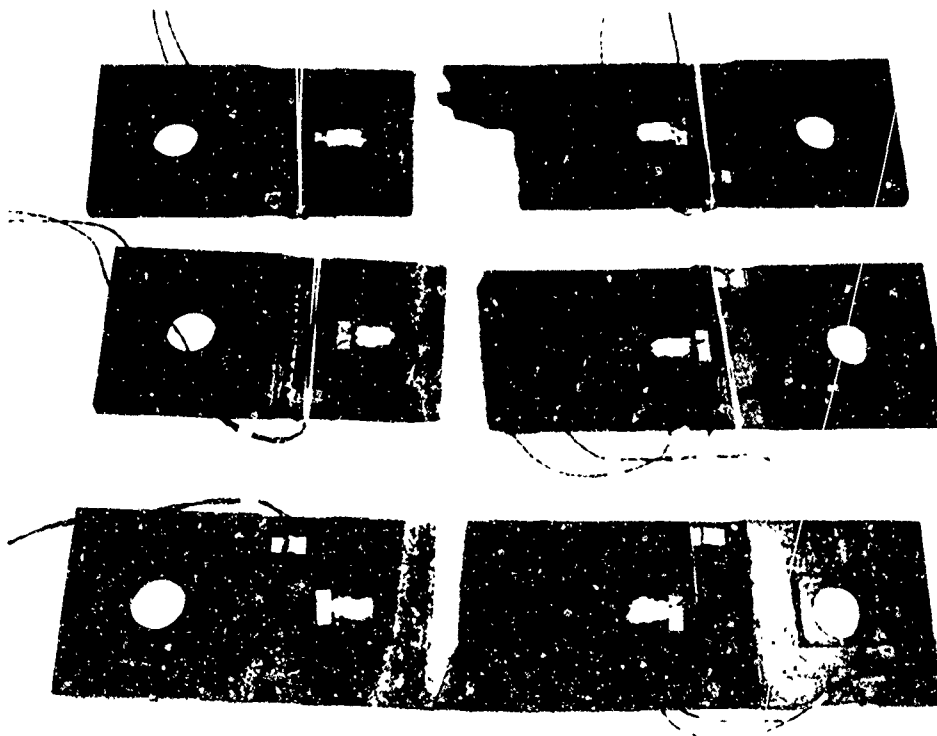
Typical 1/5-Scale Specimen Static Test Failures
